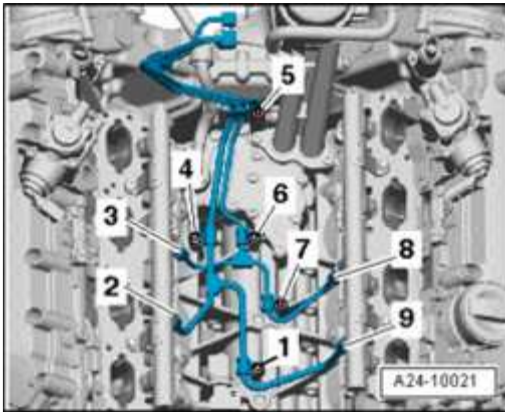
Identifying Bolts On High Pressure Line Retaining Clamps, Fuel Injectors Electrical Harness Connectors & High Pressure Lines
